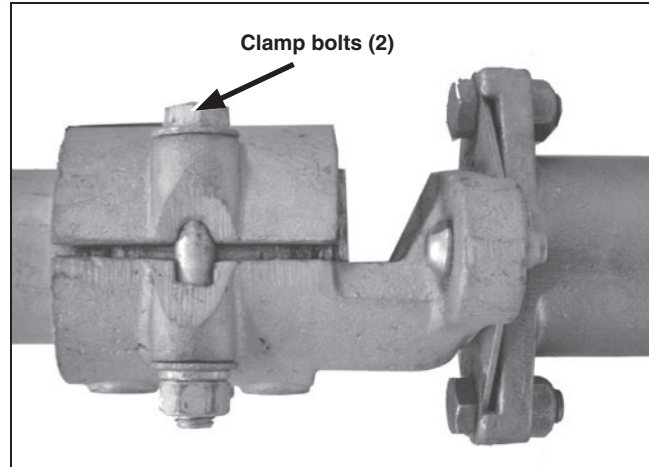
Coupling showing clamp bolt. There are two clamp bolts per coupling.
